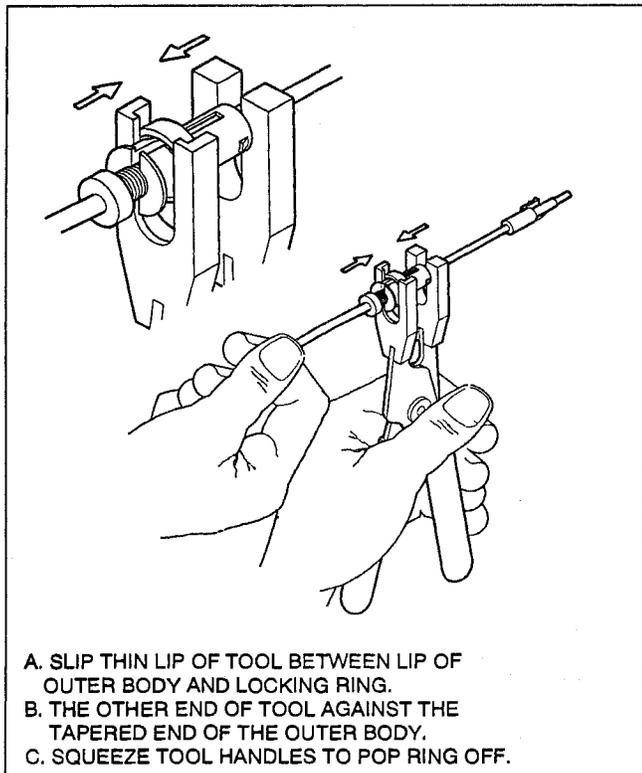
Unlocking Adjuster Ring on Park Lock Cable
